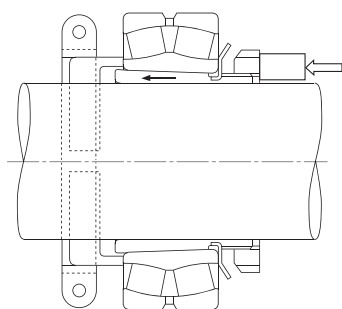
Removal of Adapter with Stop and Axial Pressure
